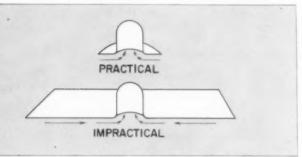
Drawing small dimples, cups, cones or flared holes in large sheets may cause the metal to stretch and tear locally.
